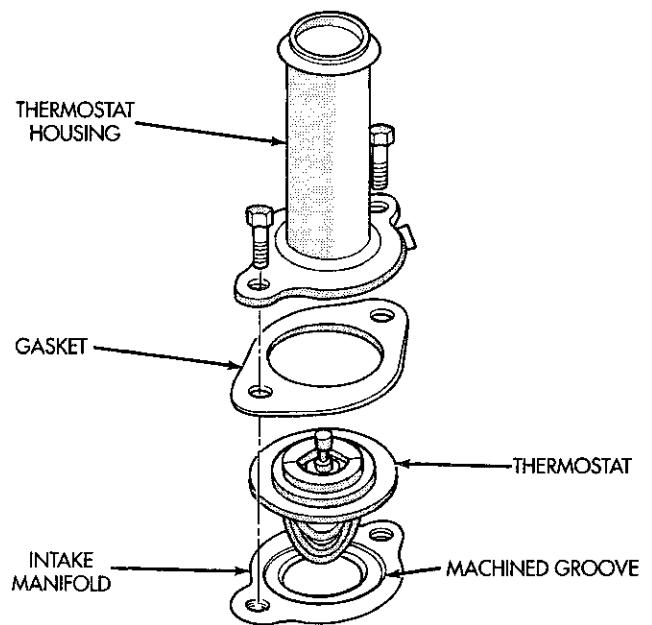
Thermostat—3.9L V-6 or 5.2/5.9L V-8 Gas Engines
